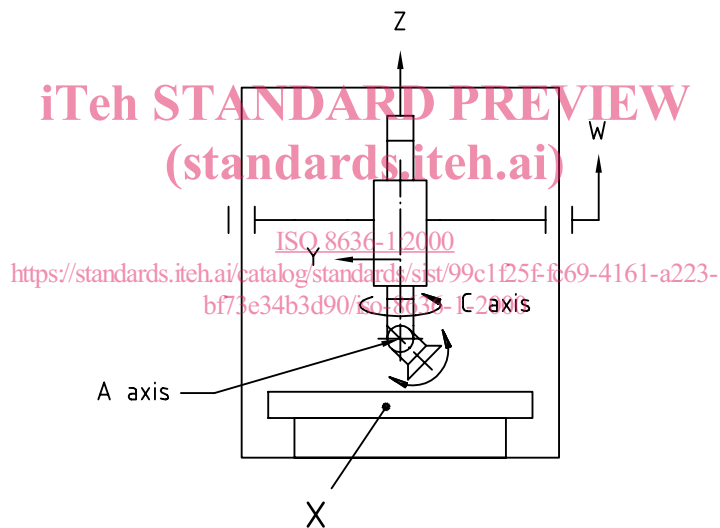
Type 4: Machine with one milling head on the cross-rail swivelling on axes C and A
